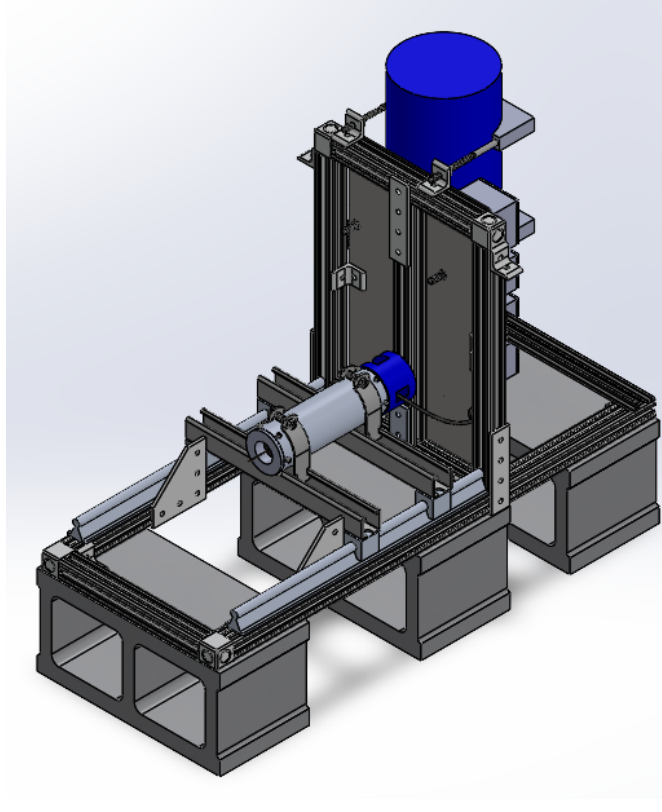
Test stand assembly with oxidizer system, combustion chamber assembly, and control boxes.
